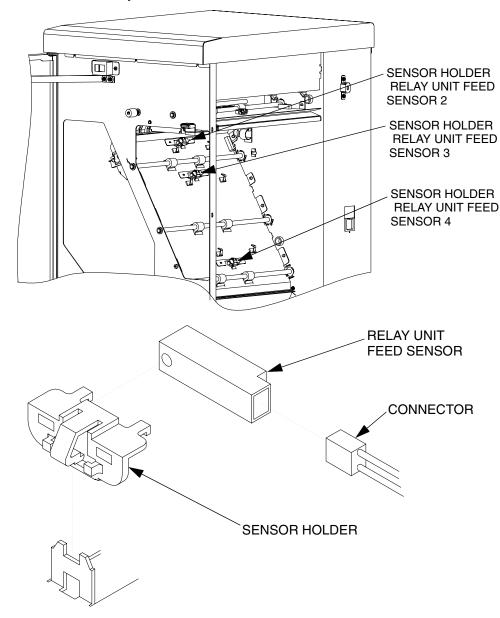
Removal of the Relay Unit Feed Sensor 2, 3 and 4
